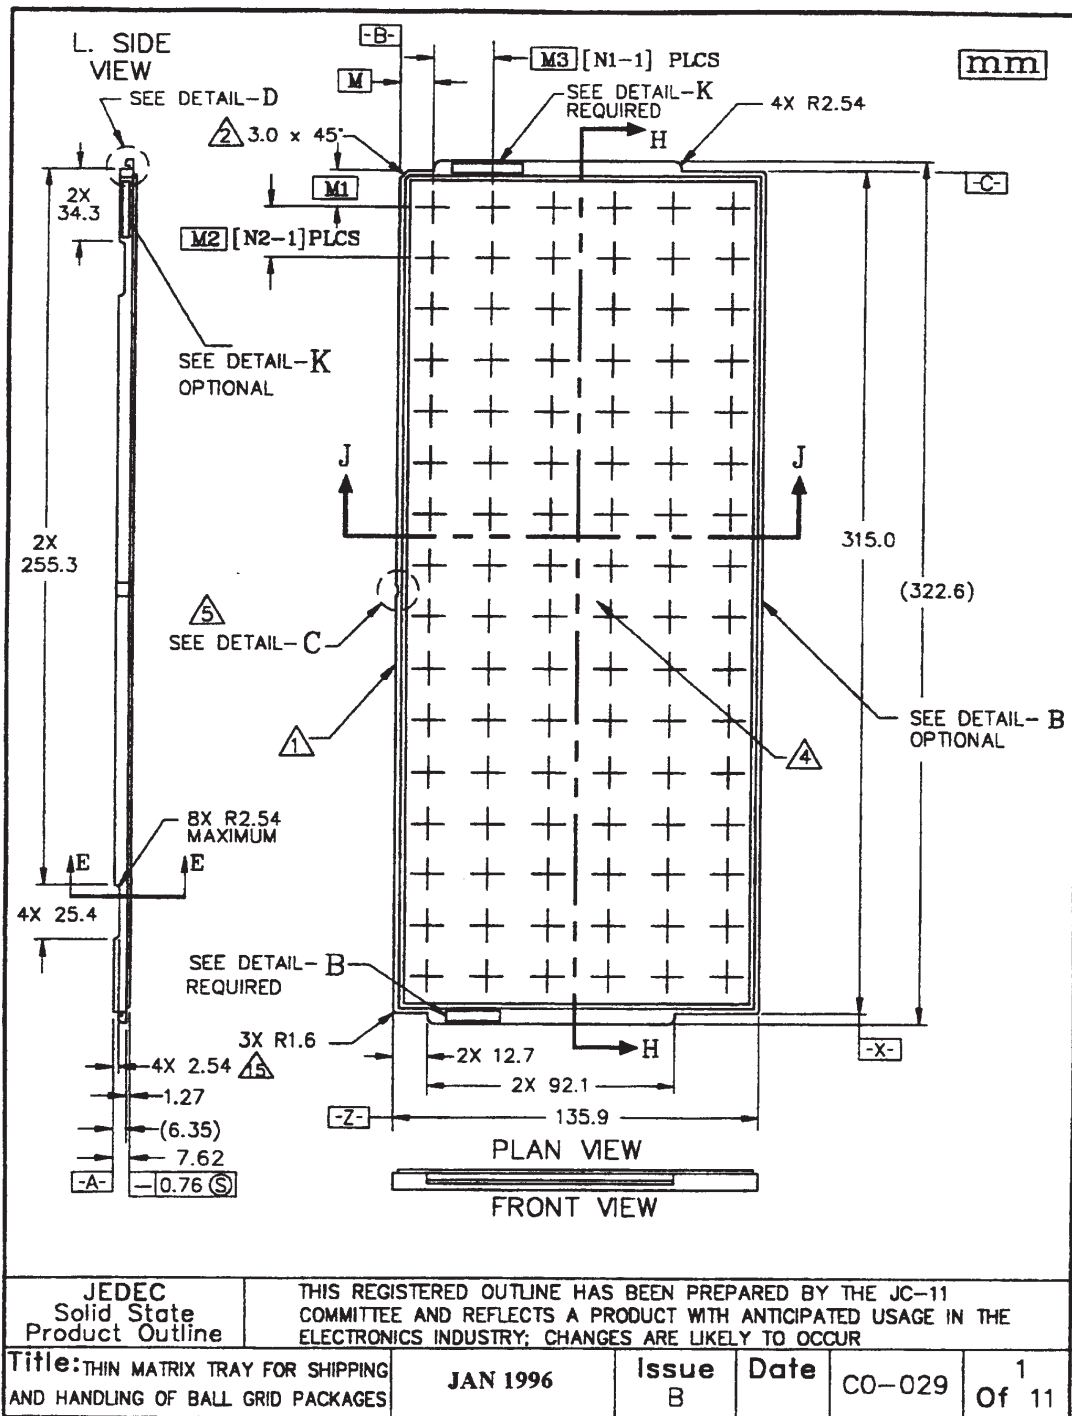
Example of a Carrier Registered-Outline Drawing Top Sheet
